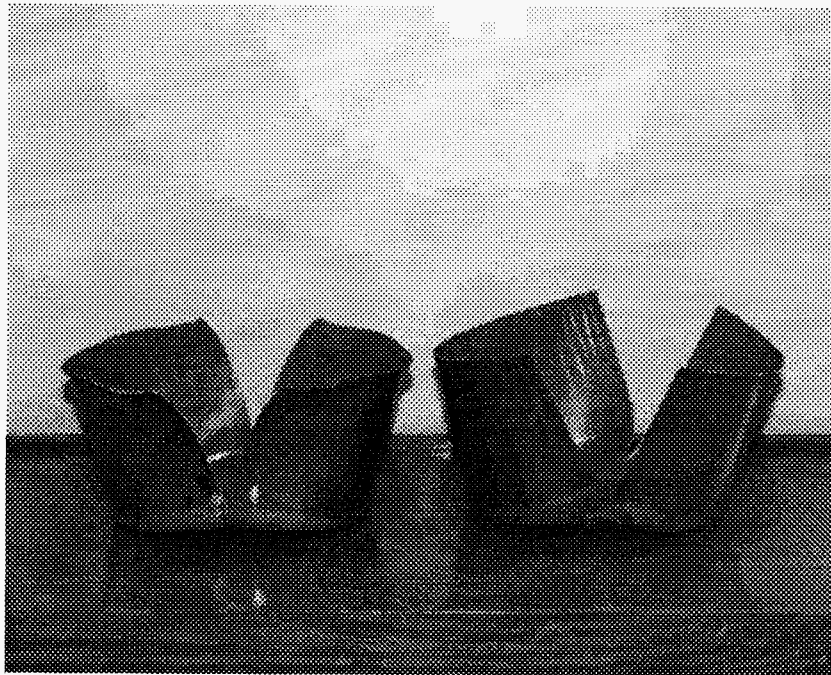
Notched cups tested at 0°C showing a ductile fracture on the left and a brittle one on the right
